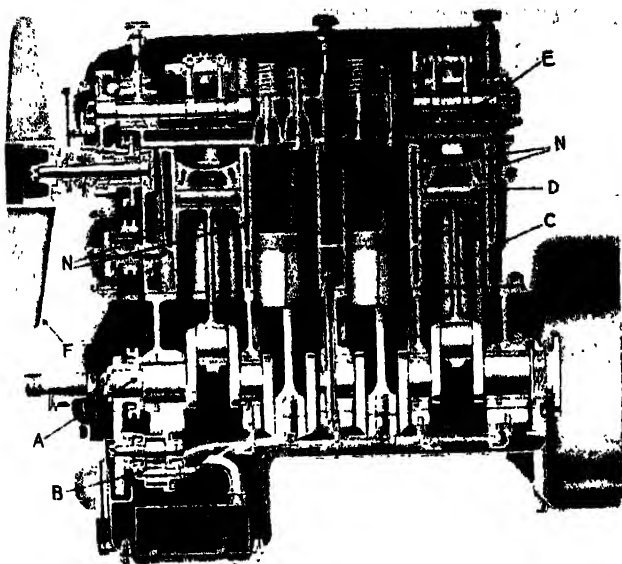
FOUR-CYLINDER PETROL ENGINE. Cross-section of a four-cylinder engine as used for some buses and lorries, showing the arrangement of pistons, crankshaft, and other parts.
